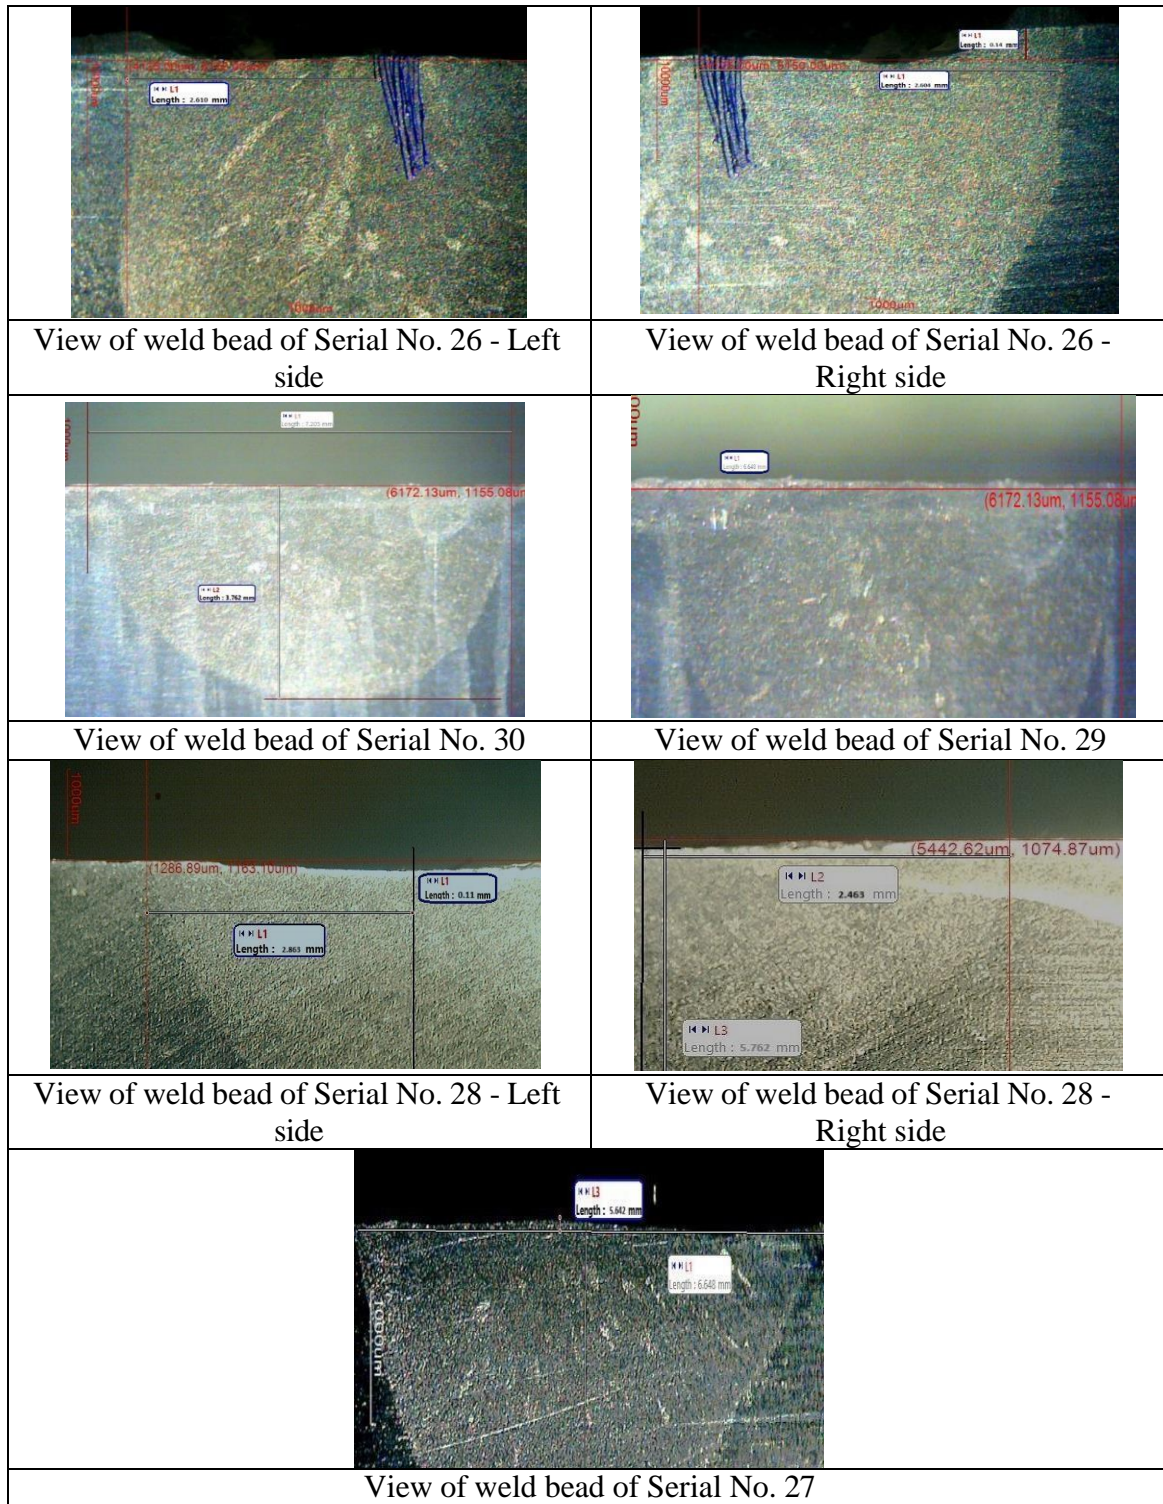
View of weld bead geometry typical weld beads of Experiment Set 3
